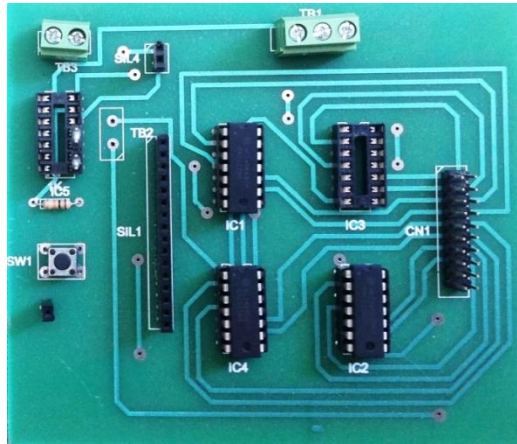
Assembled PCB multiplexing system using MC4066B
